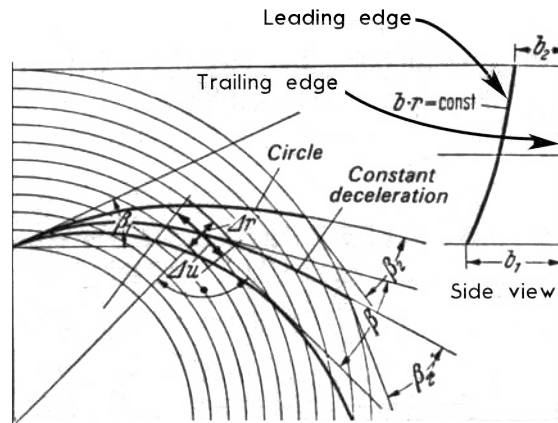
Configuration of a fan blade showing side view profiles for the leading and trailing edge section (Eck, 1972:103)
